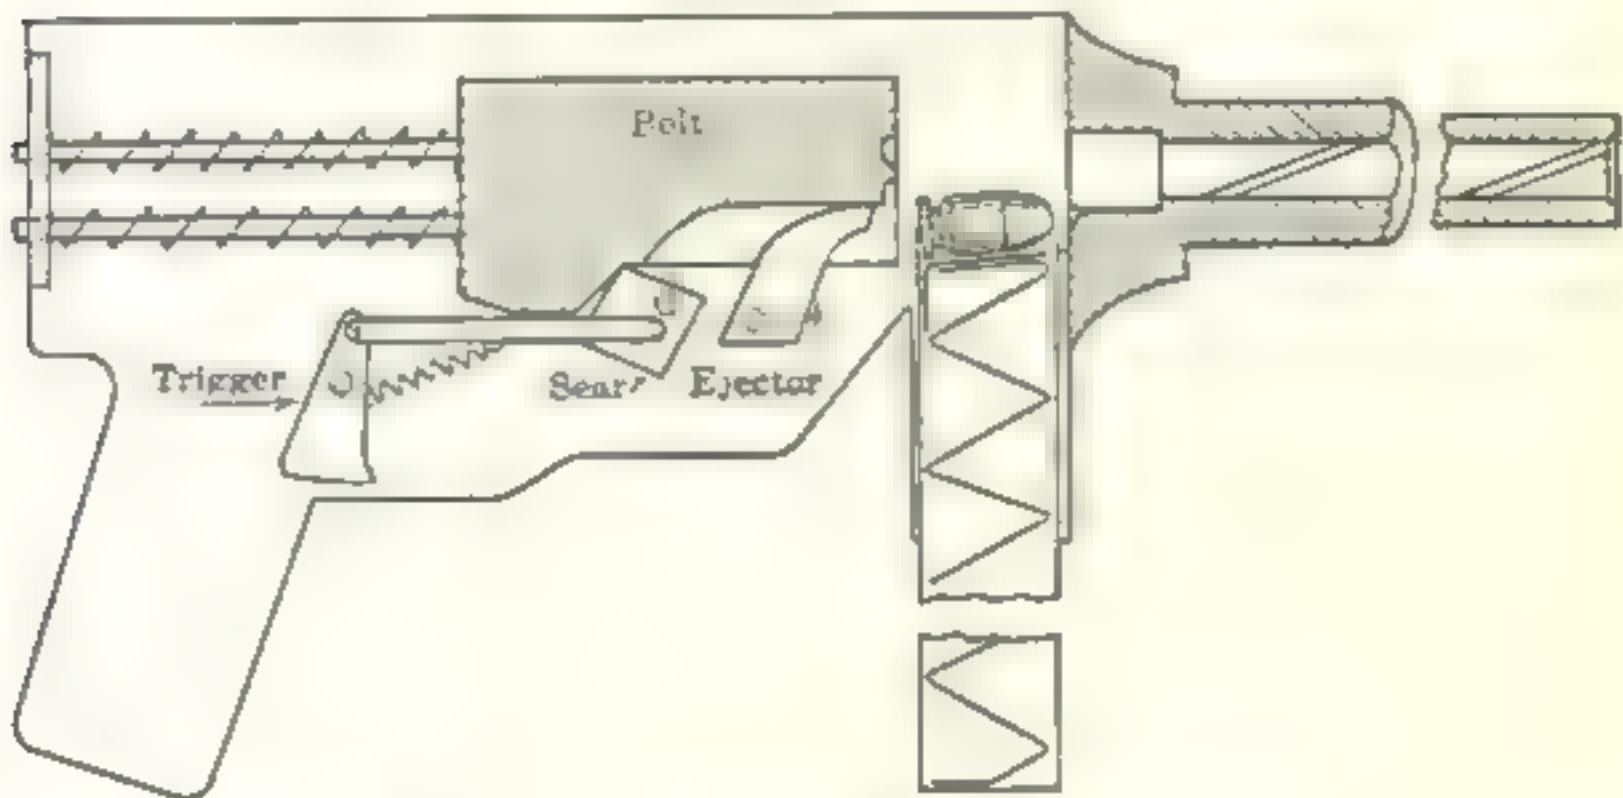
U. S. Submachine Gun, Cal. .45, M3.
